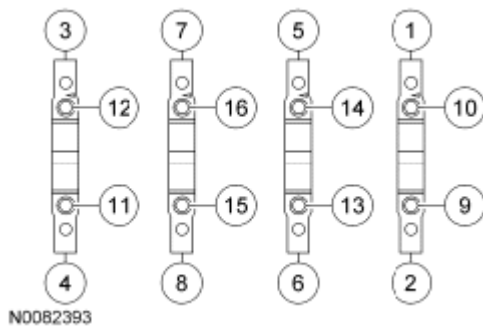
Identifying Main Bearing Cap Side Bolt Remove Sequence
